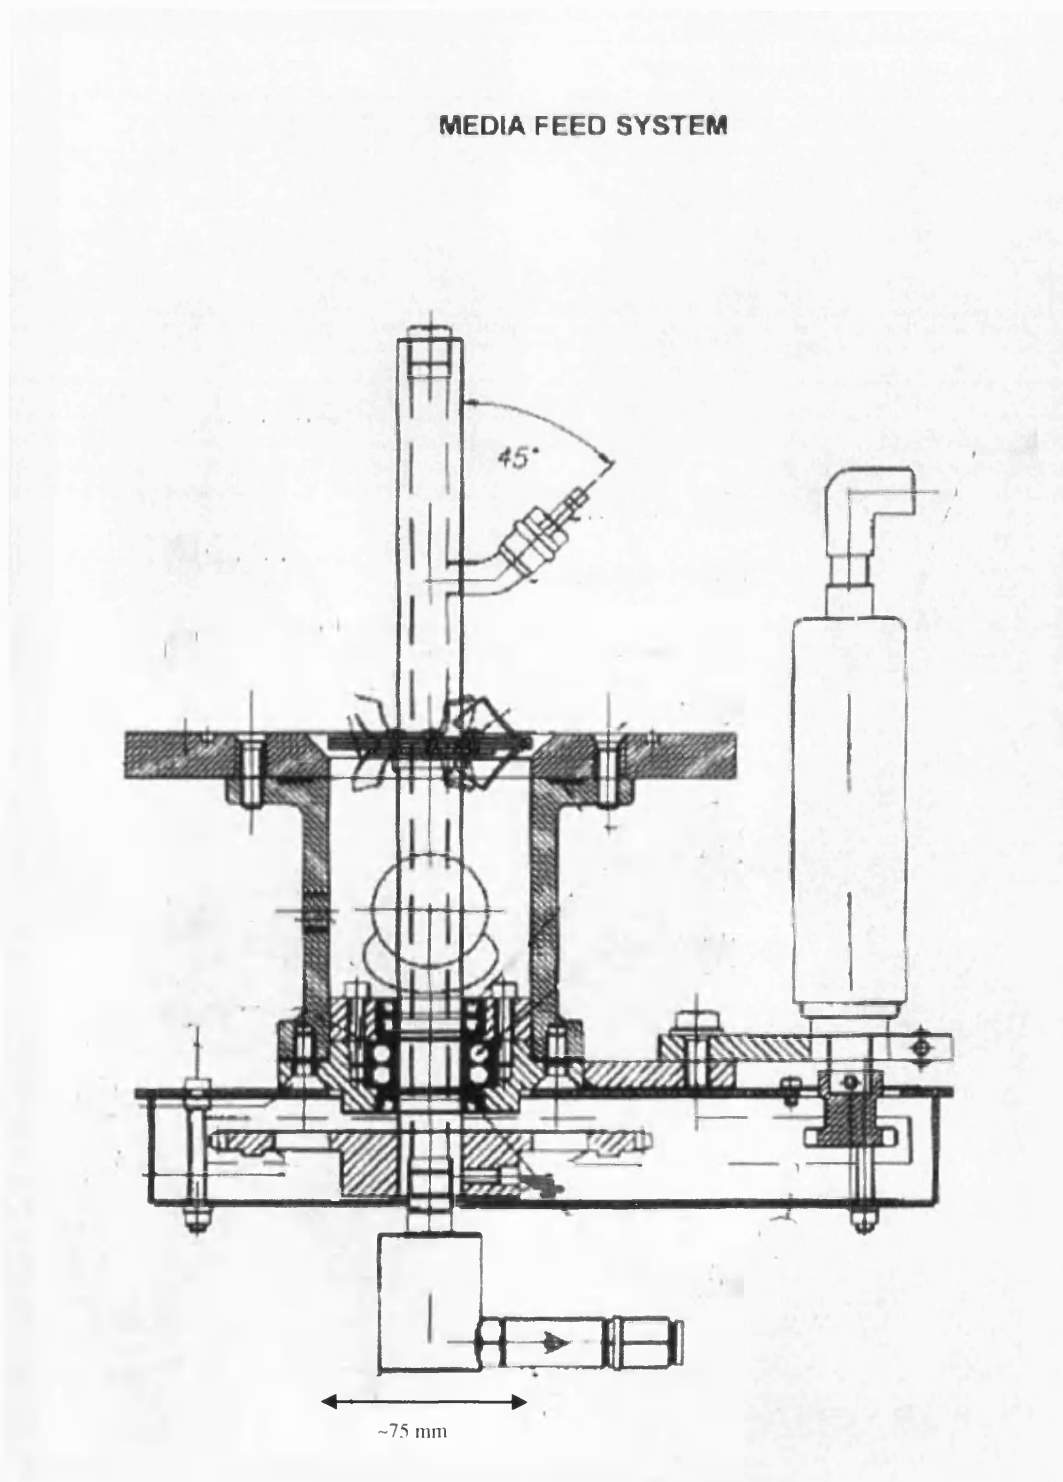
VESSEL HOPPER AND POP-UP VALVE
